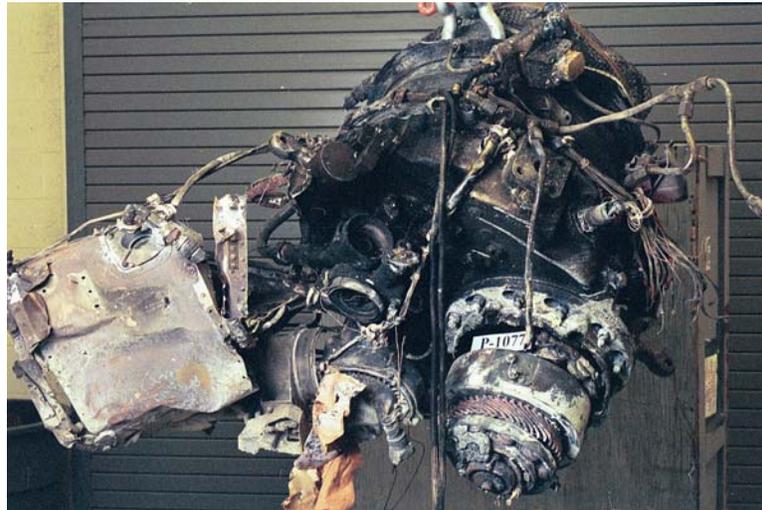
Gearbox and load compressor broken away from APU power section (Honeywell)
